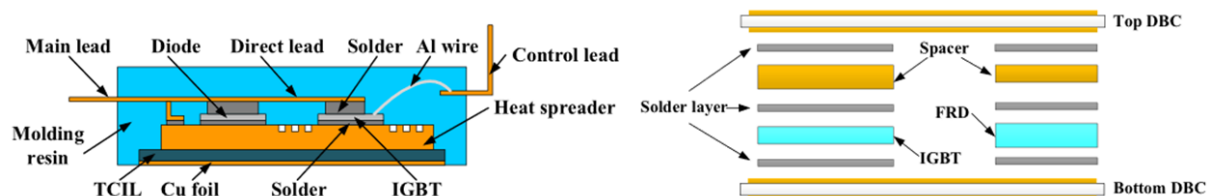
Example of planar top connections. Left) Direct Lead Bonding technology. Right) Sandwich structure with spacers [15]
